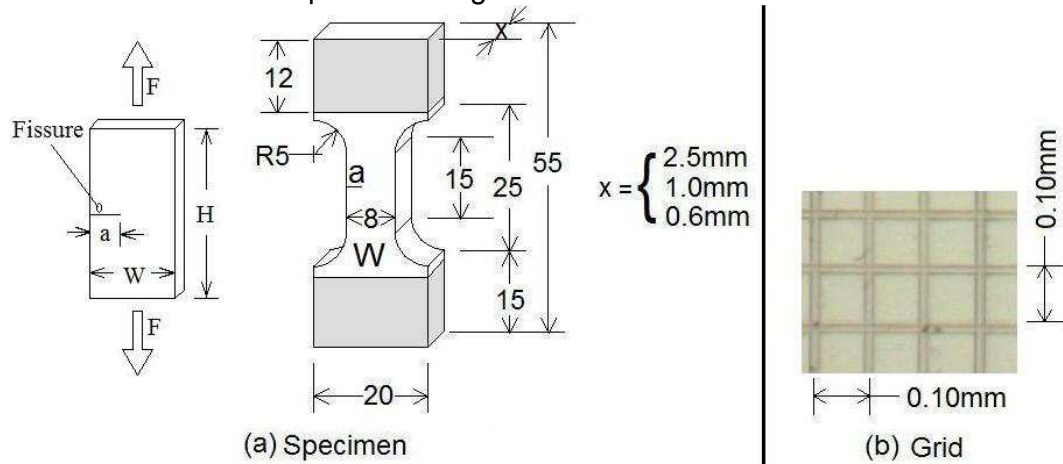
(a) Specimen geometry and (b) engraved grid on specimen surface.
